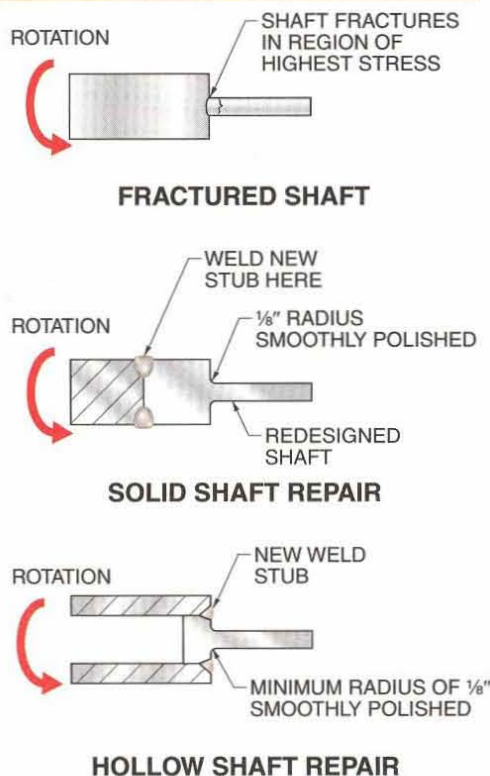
When making a structural weld repair, ensure the weld is made away from the region of highest stress.
